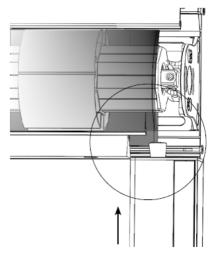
lift bottom rail inside channel and feed keder into funnel.
